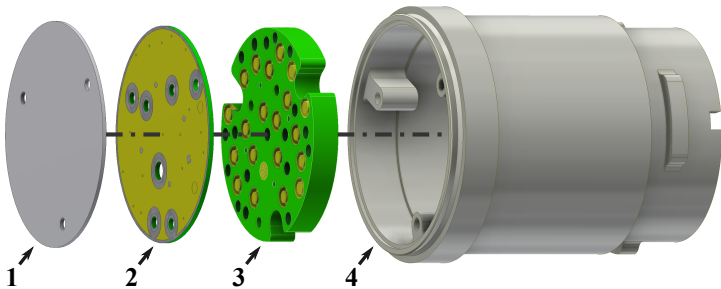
Explosion view of the TAS III design encompassing a matching disk (1), a composite disk (2) which holds the piezoceramic elements, a PCB disk (3) and a plastic housing (4).
